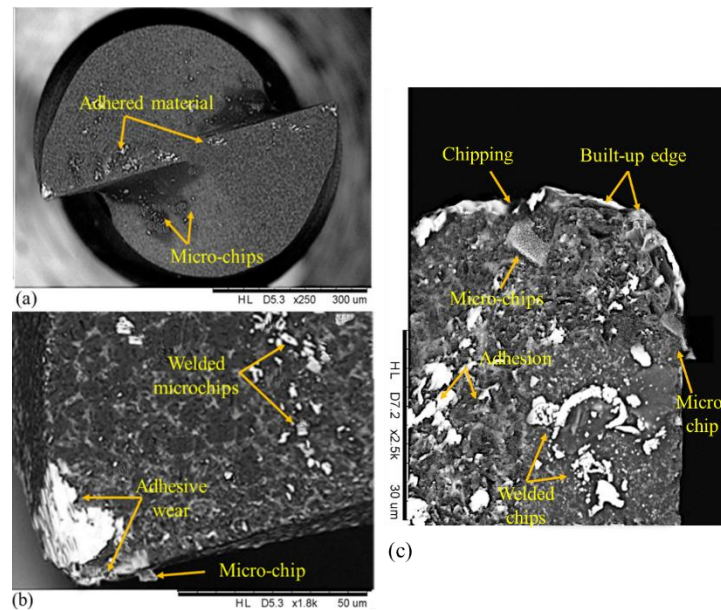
15 Tool processed on wrought Ti6Al4V ;(a) Cross section (b) cutting edge (c) rake face
